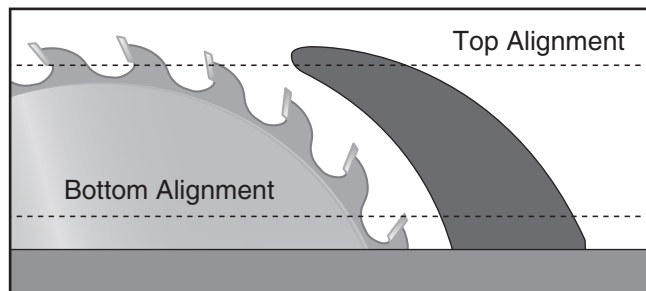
Example of checking top and bottom riving knife parallelism with blade.
